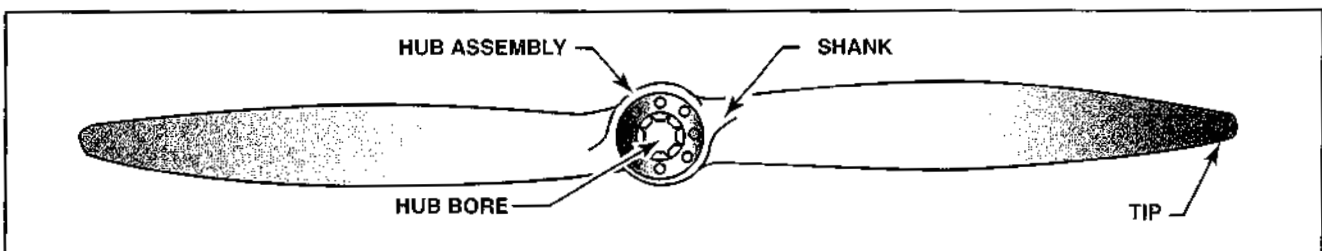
The blades of a single-piece propeller extend from the hub assembly. Blades have a shank and a tip; the hub assembly has a hub bore and bolt holes that facilitate propeller mounting.
